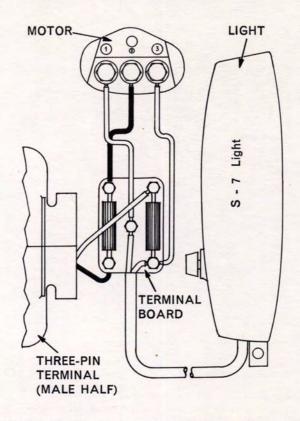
B.A. 60 Motor Terminal Board Connection Guide.
